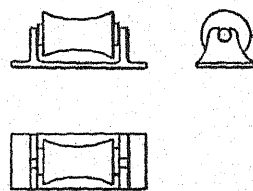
Front and End Elevations and Plan of Roller Stool for Pipes.
